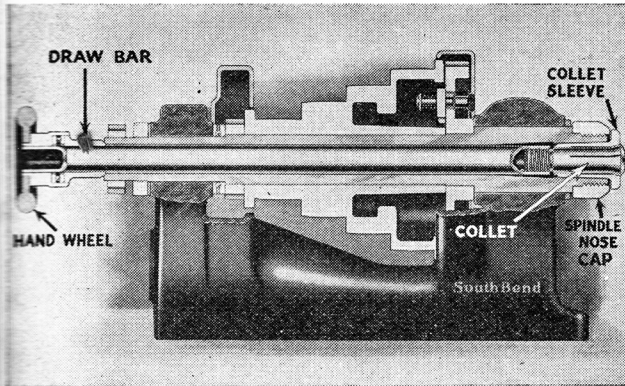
Cross-section of headstock showing construction of draw-in collet chuck attachment.
